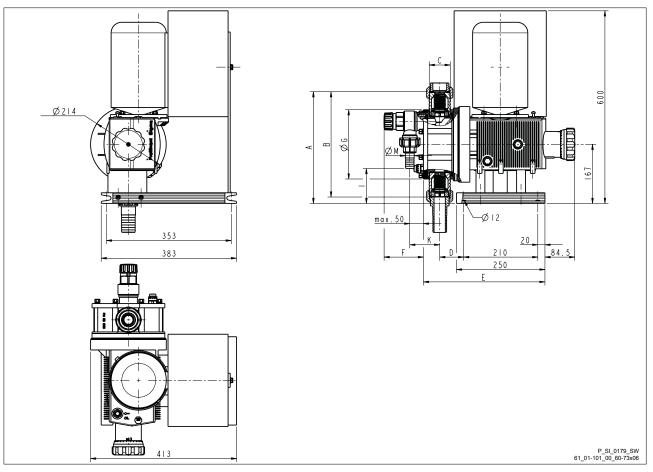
Dimensional drawing of Sigma/ 3, S3Ba, with "physiologically safe" liquid end - dimensions in mm - Drawing is not strictly binding.
